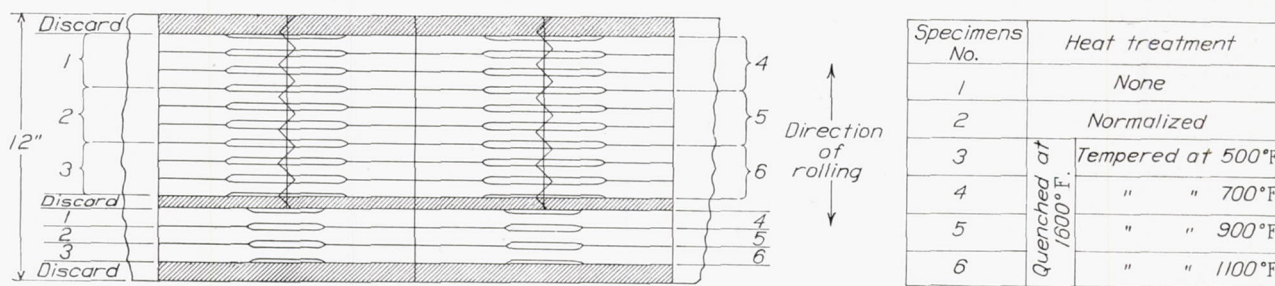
Layout of butt joints and tensile specimens of the base metal in the steel sheets.
